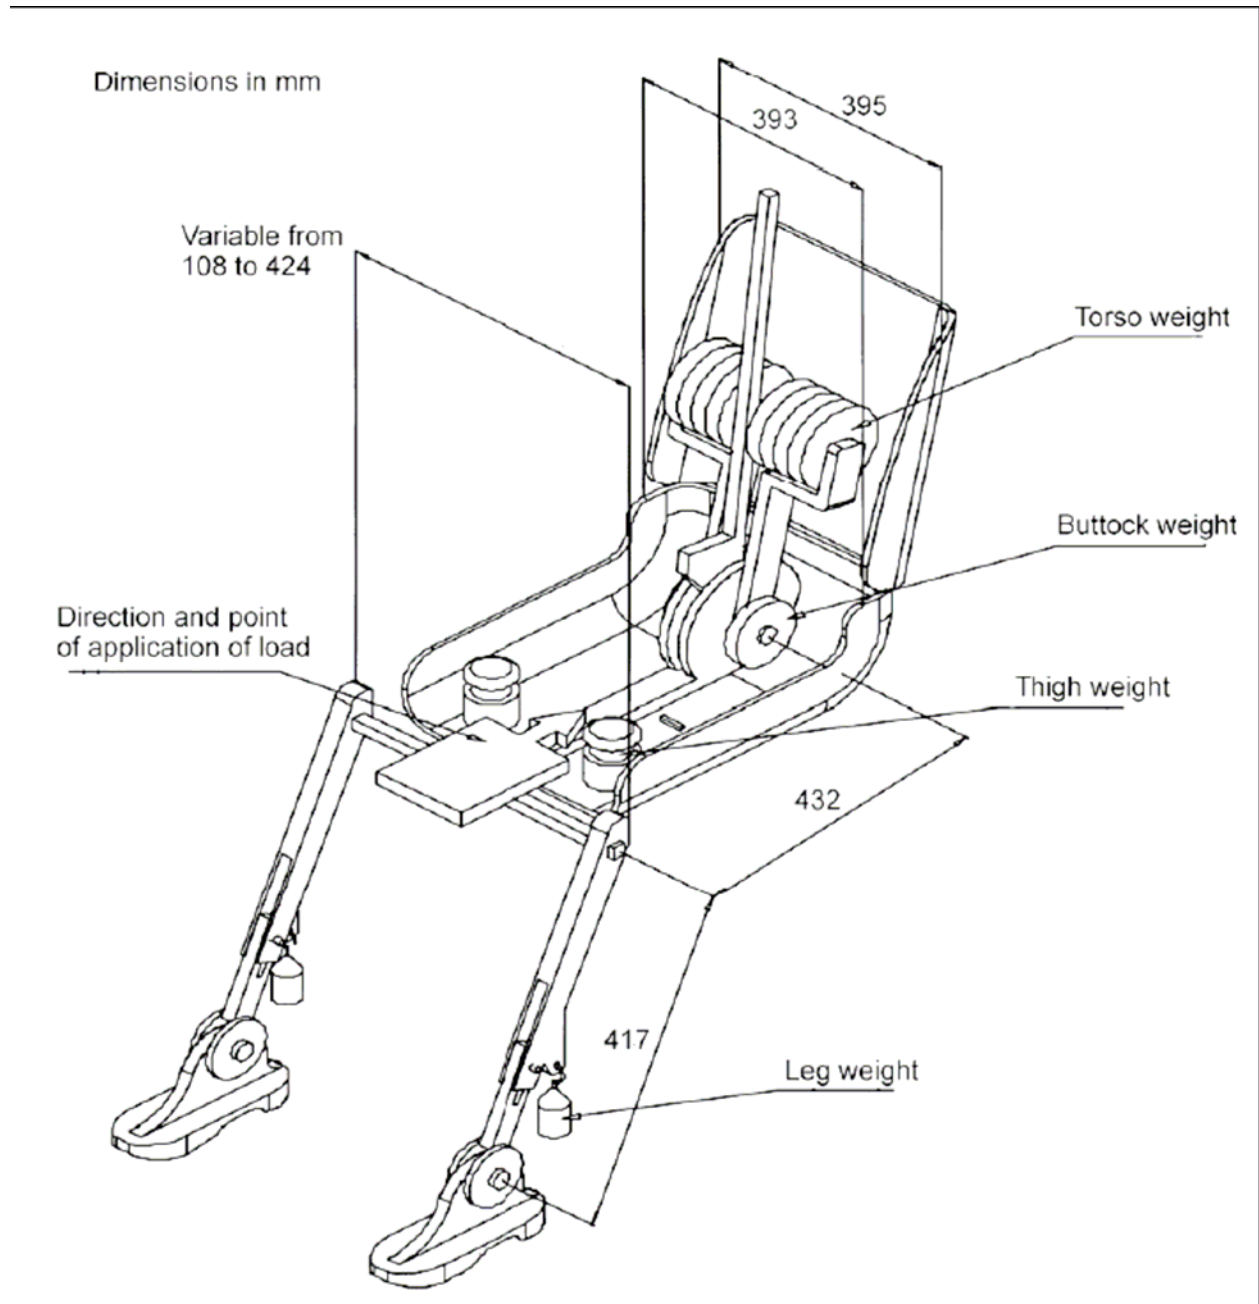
Dimensions of the 3D H machine elements and load distribution
